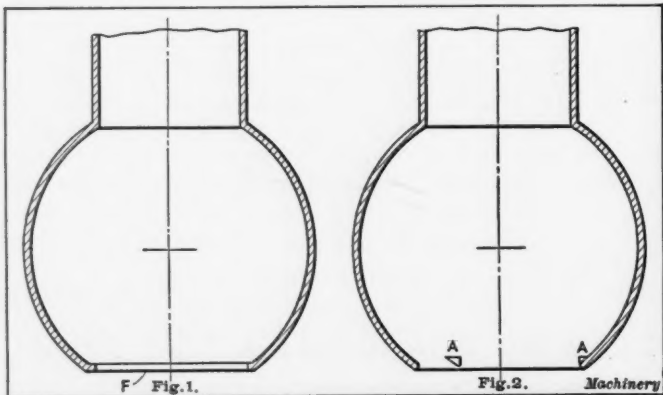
Ball Joint having Internal Flange to provide Clamping Surface
